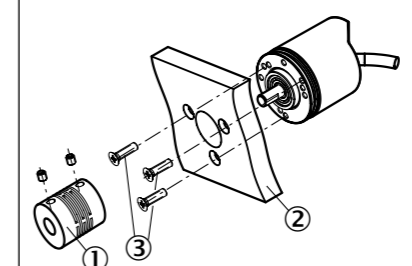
Installation DBS36 face mounting flange via mounting spigot
